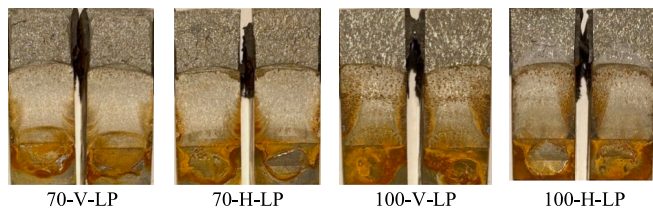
Fracture surfaces of the CFCG tested WAAM specimens.
